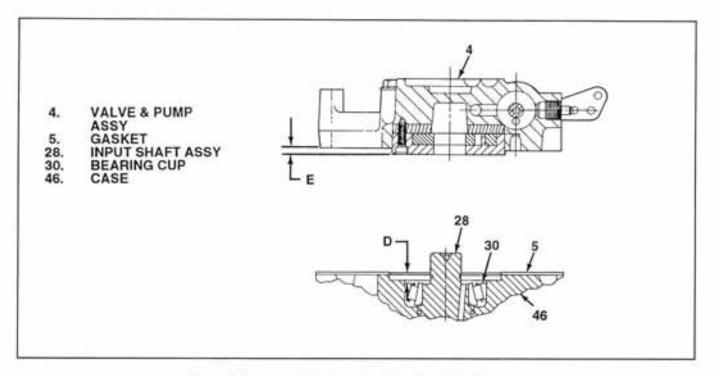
Determining Input Shaft Bearing Shim Thickness
